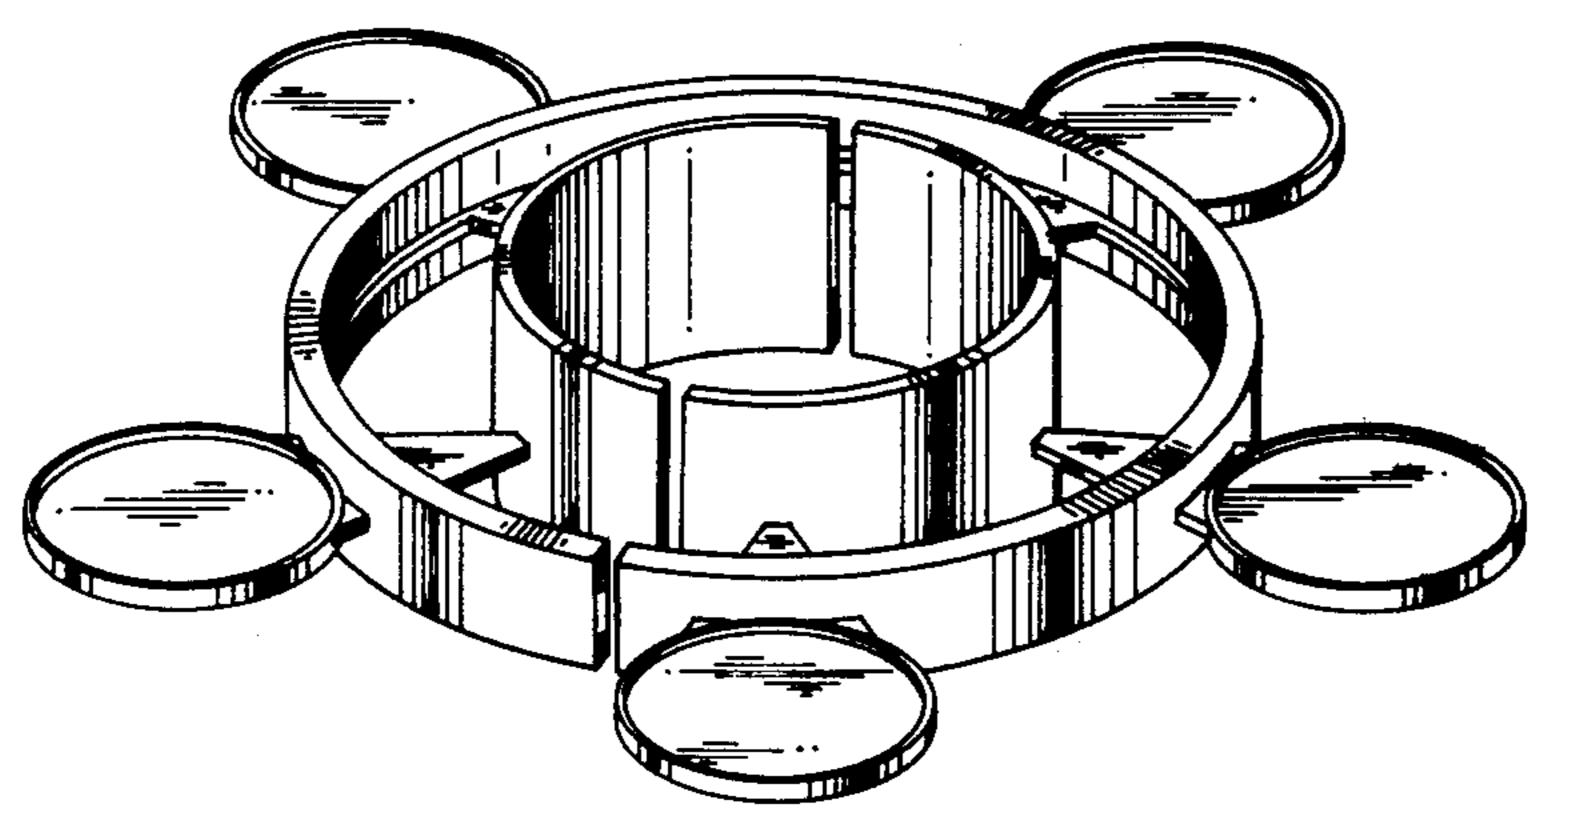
is an end elevational view thereof; and FIG. 4 is a perpsective view of a spinner for bike hub showing a second embodiment of my new design, the
